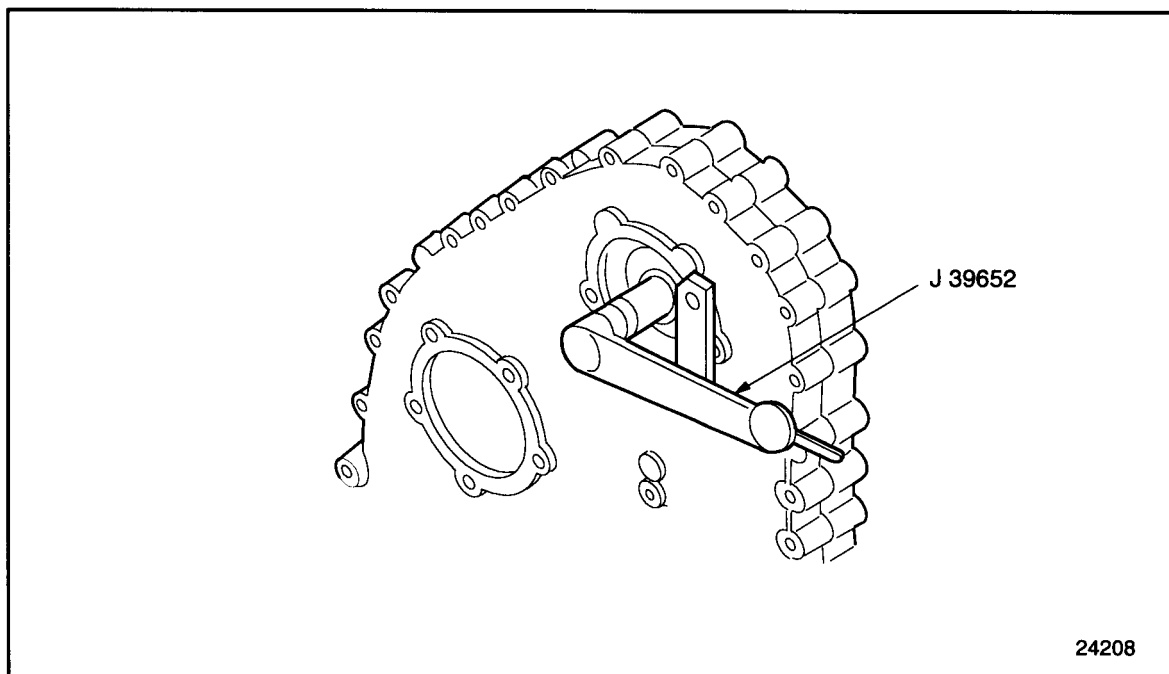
Camshaft Drive Gear-to-Camshaft Bolt Tightening
